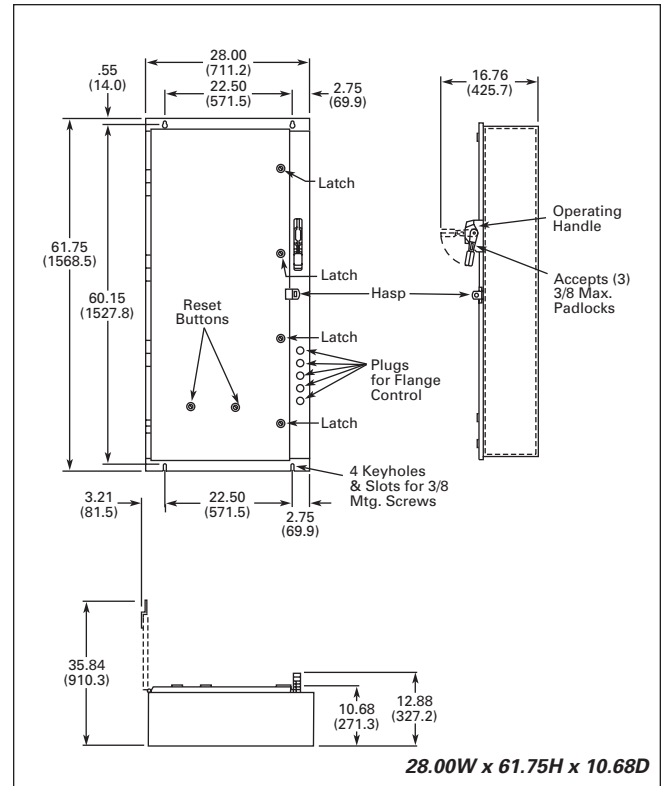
Box E, Type 12 — Approximate Dimensions in Inches (mm)
